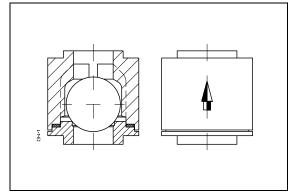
Single Ball Valve - Sectional and Plan View
